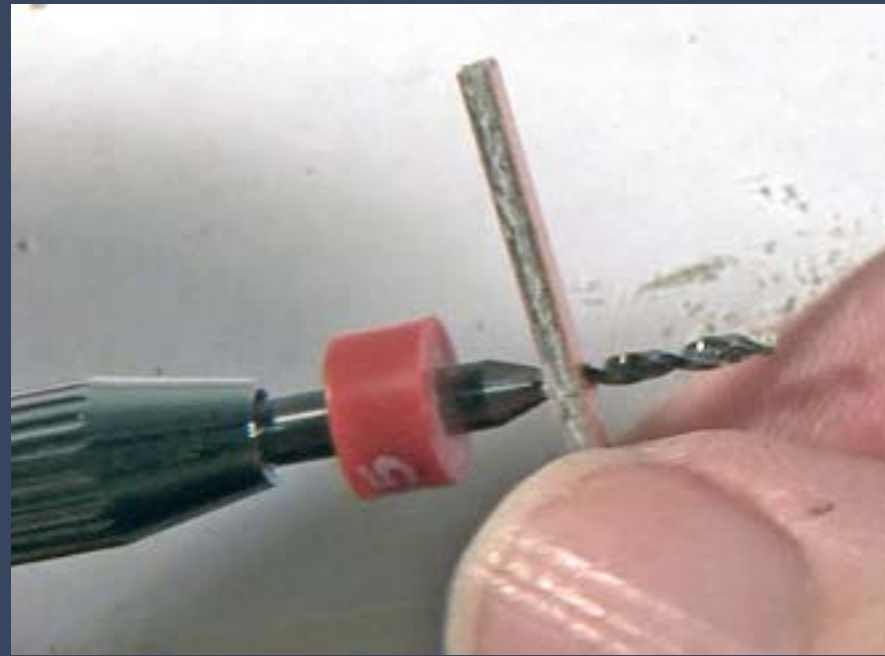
I drill a #53 hole in the throwbar using a pin vise.
